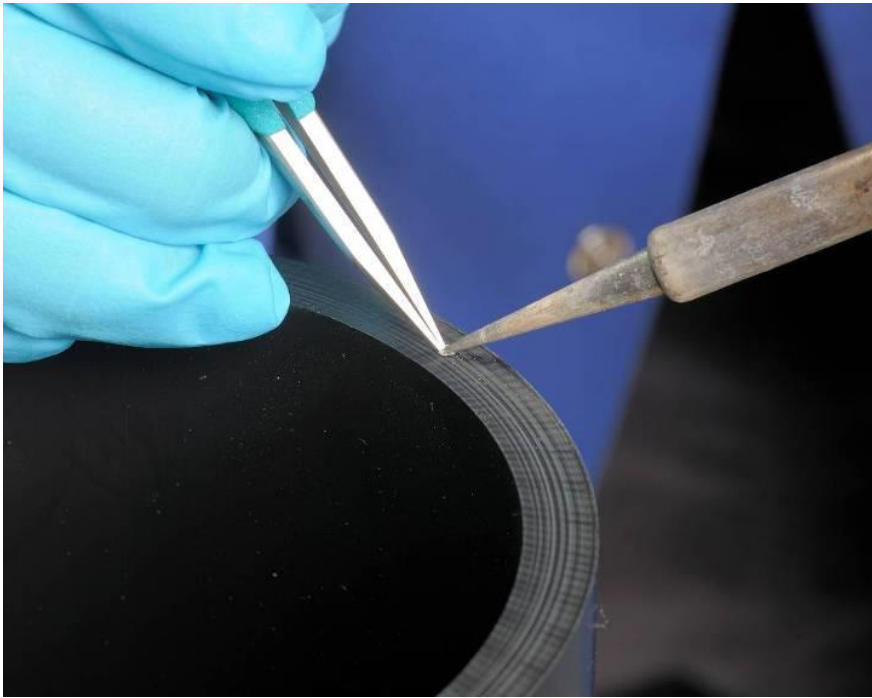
Heat staking aluminium disc to the trimmed end of a pipe for butt fusion welding.
